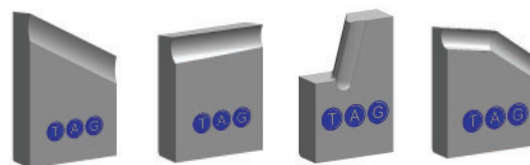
Formed tools: Examples of bevel, facing, internal, and compound tools
